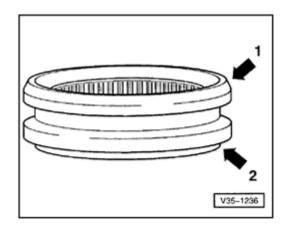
Installation position of operating sleeve for 1st and 2nd gear
